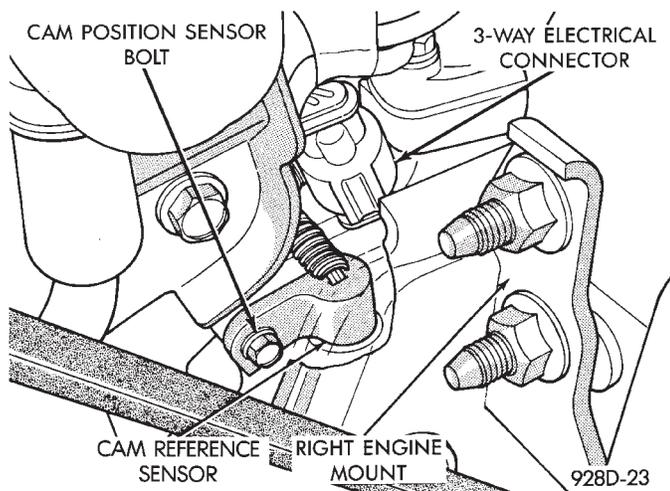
Camshaft Reference Sensor Location—3.3L and 3.8L Engines
